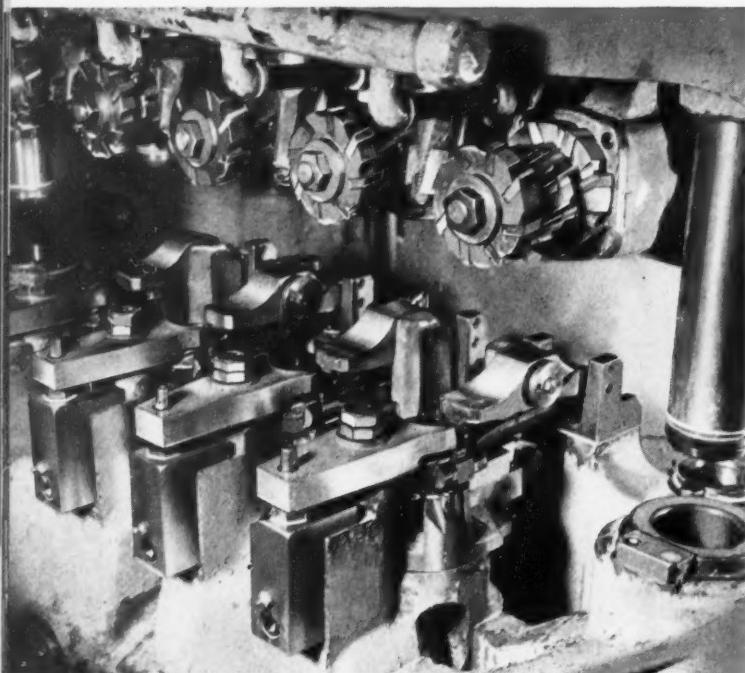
(Top) Tooling for Drilling the Crankpin and Wrist-pin Holes and Straddle-milling the Crankpin End of the Connecting-rods
